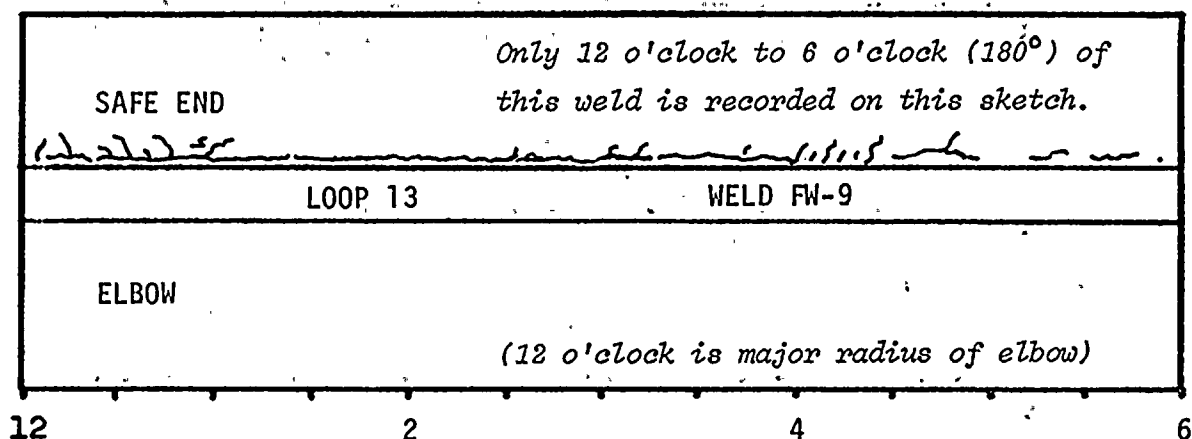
Dye Penetrant inspection results, Loop 13 welds.
